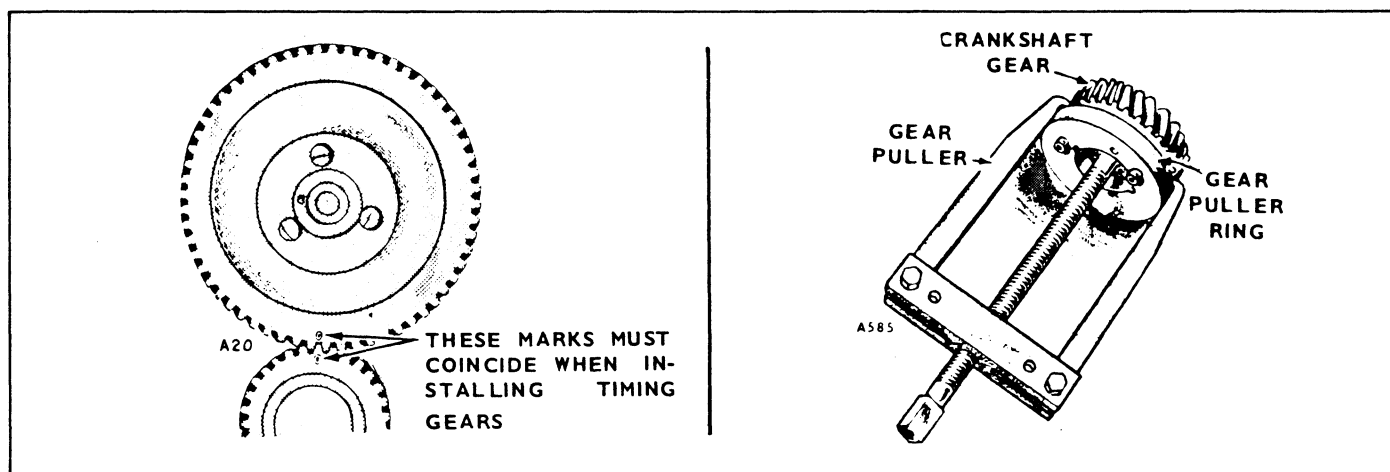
TIMING GEAR REMOVAL AND INSTALLATION
